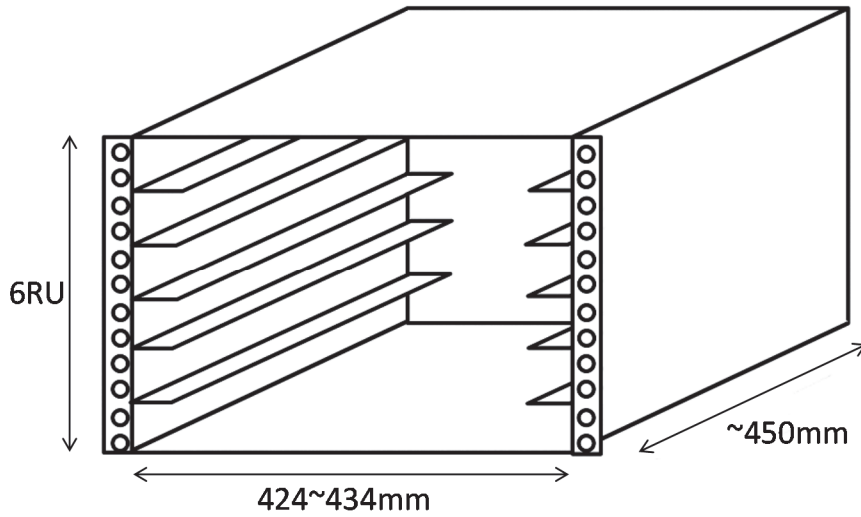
(a): Configuration of the standard chassis. The chassis is compatible with a 19-inch rack. Examples of the specific dimensions are illustrated.
